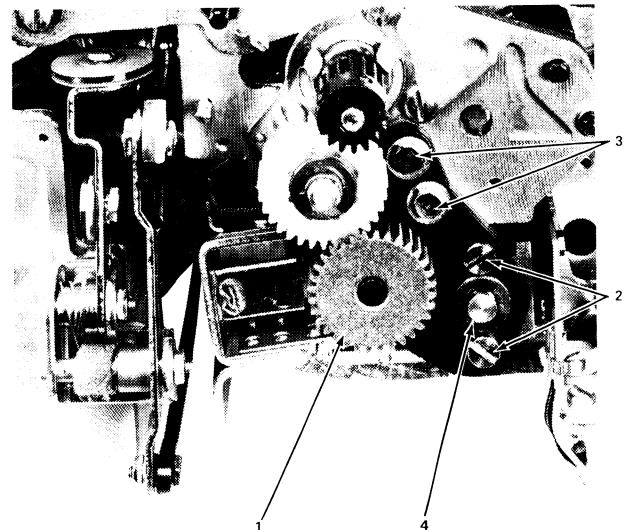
Selector Bail Removal (Left Side of Printer, Gear Guard Removed)
